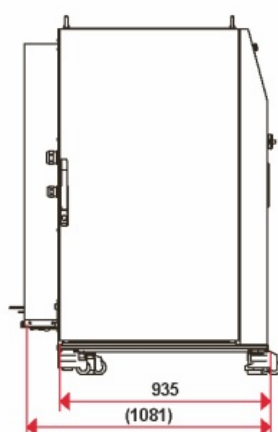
B Series - 2000 W - 5000 W Fiber Laser Welder
